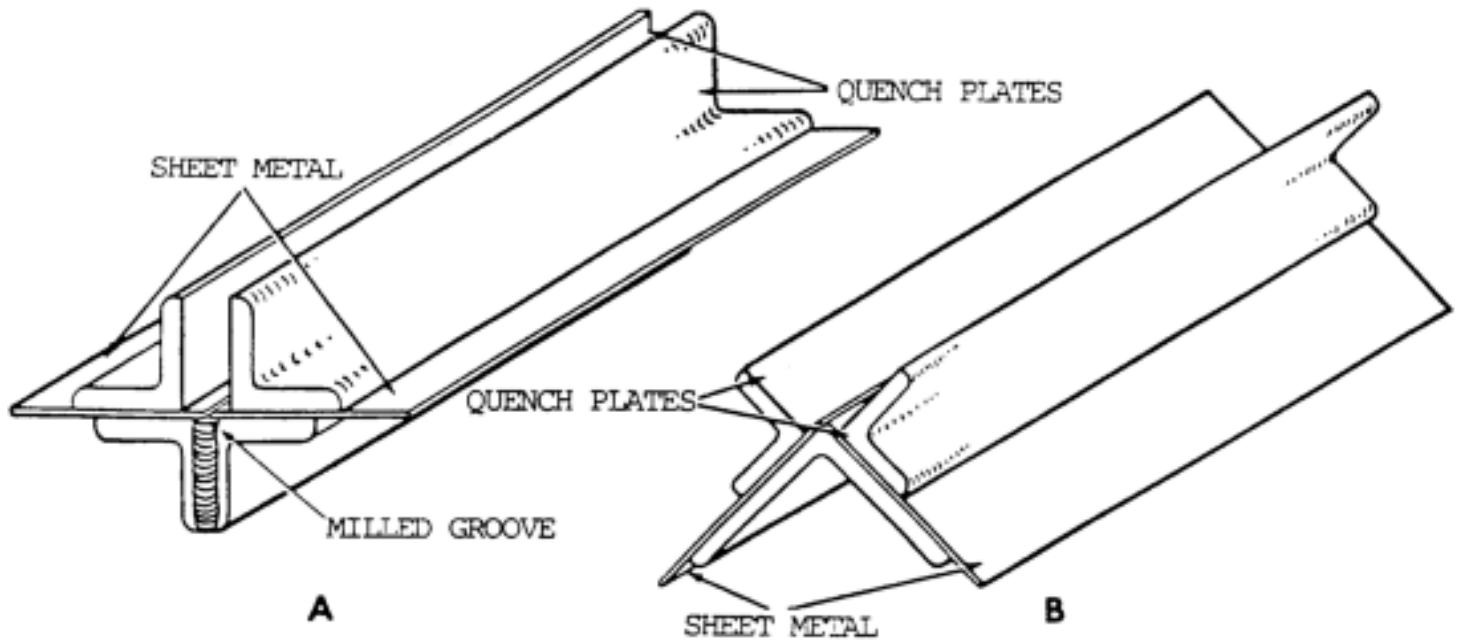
Quench plates used in the welding of sheet metal.
